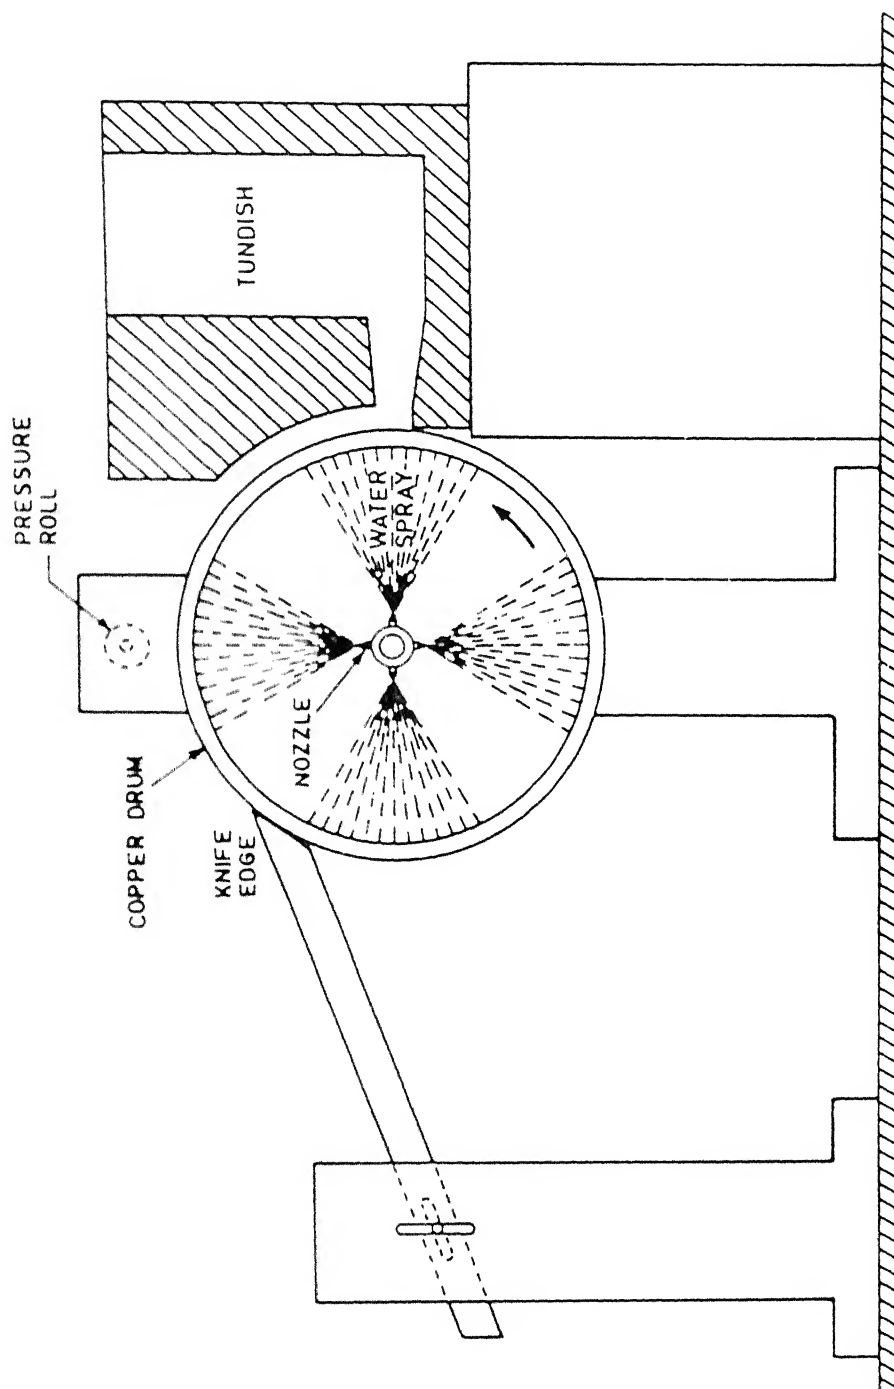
Schematic sketch of the Single Roll (Drum) Horizontal Strip Caster
